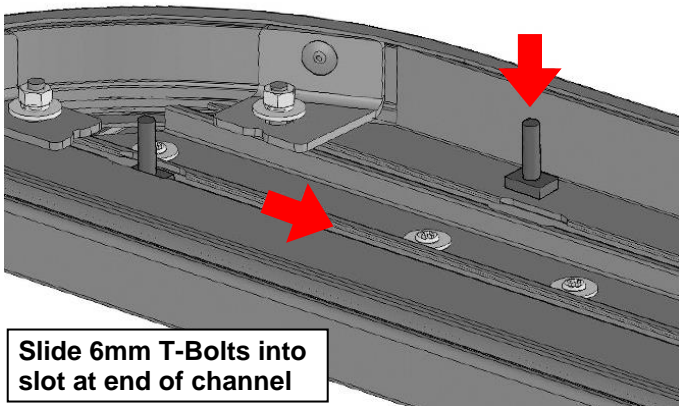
Passenger/Right rear Mounting Bracket and Support Bracket installed
